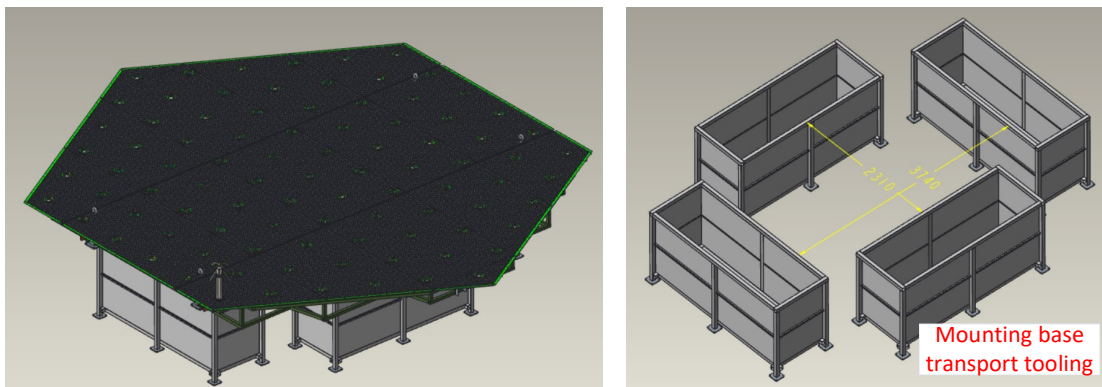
Transport Tooling Combined into Assembling Tooling
